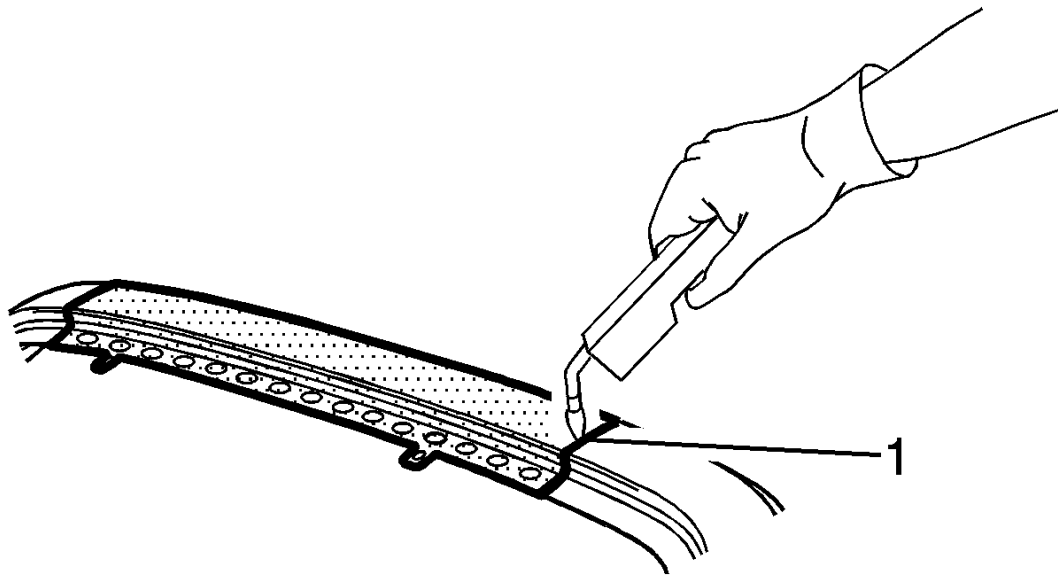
Plug Welding Service Part (Full Panel)
